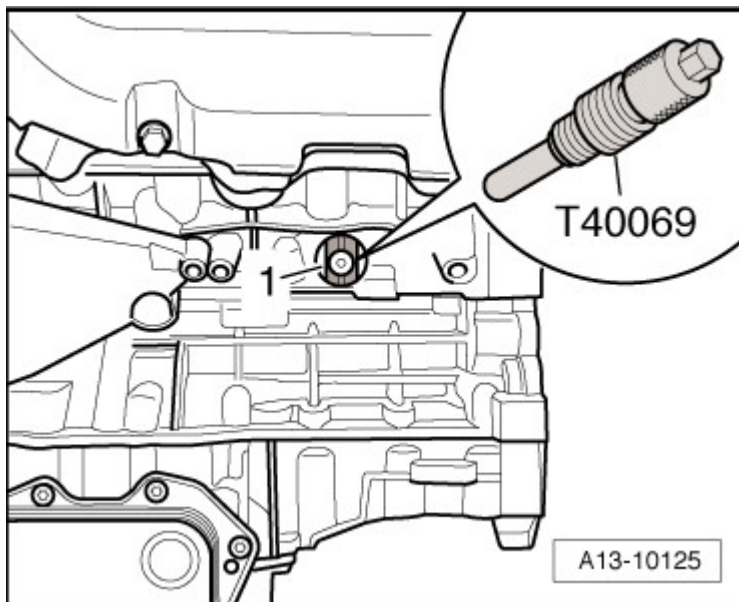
Identifying Crankshaft Holder T40069 In Hole, Removal/Installation
